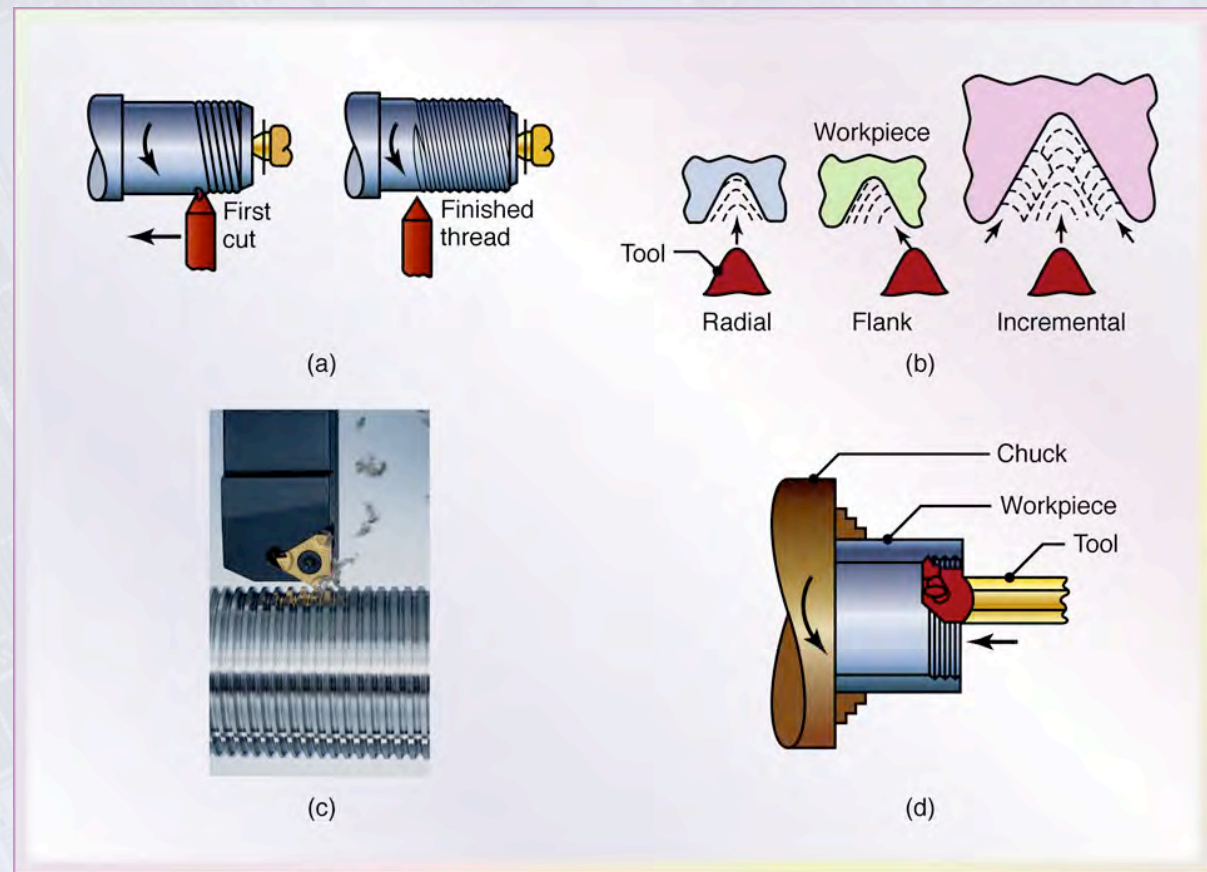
(a) Cutting screw threads on a lathe with a single-point cutting tool. (b) Cutting screw threads with a single-point tool in several passes, normally utilized for large threads. The small arrows in the figures show the direction of the feed, and the broken lines show the position of the cutting tool as time progresses. Note that in *radial cutting*, the tool is fed directly into the workpiece. In *flank cutting*, the tool is fed into the piece along the right face of the thread. In *incremental cutting*, the tool is first fed directly into the piece at the center of the thread, then at its sides, and finally into the root. (c) A typical coated-carbide insert in the process of cutting screw threads on a round shaft. (d) Cutting internal screw threads with a carbide insert. *Source:* (c): Courtesy of Iscar Metals Inc.
